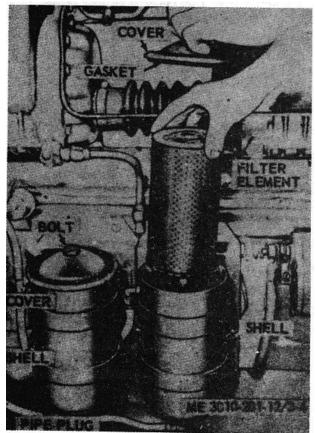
Engine oil filter service for model 687C-18-ES.
